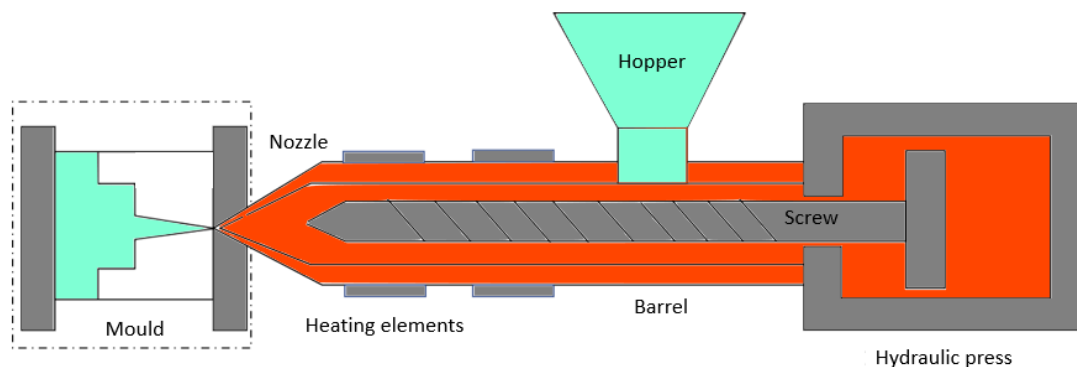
Simplified schematic of the internal machinery and main components of an injection moulding machine.
